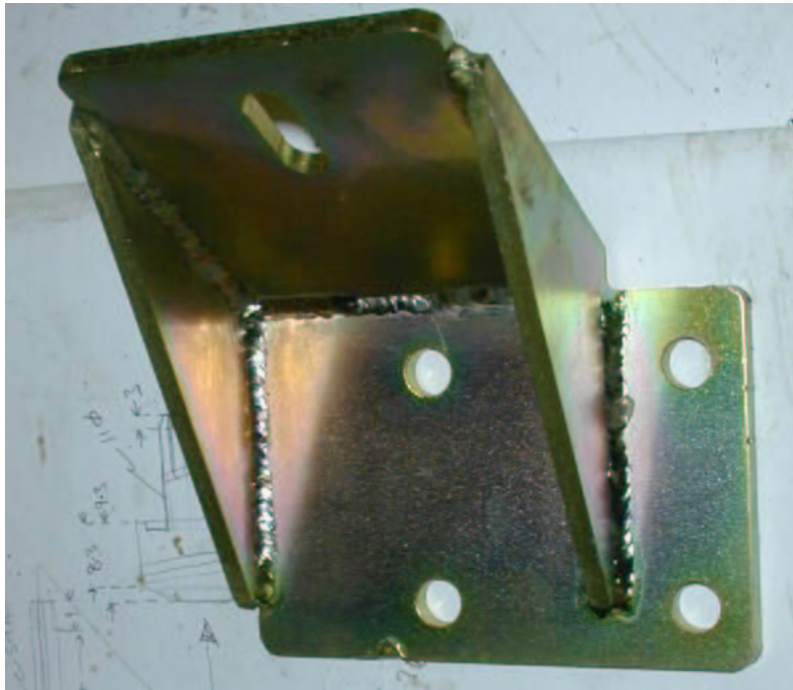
Left hand engine mount, included angle between mount and block 122 degrees.
